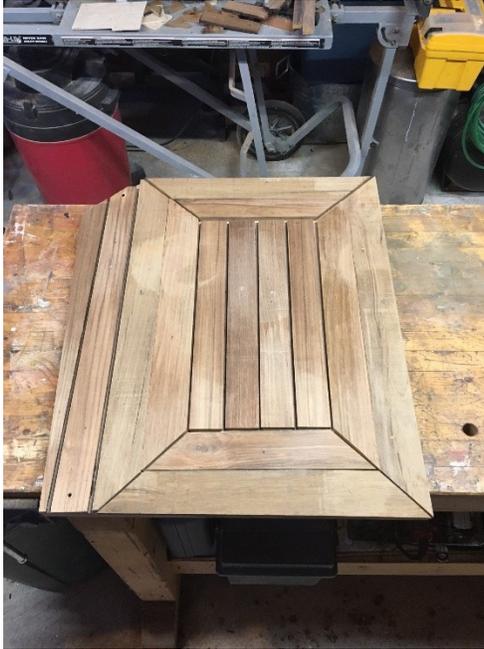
A newly created port-side hatch would replace and repair a rotted deck section
